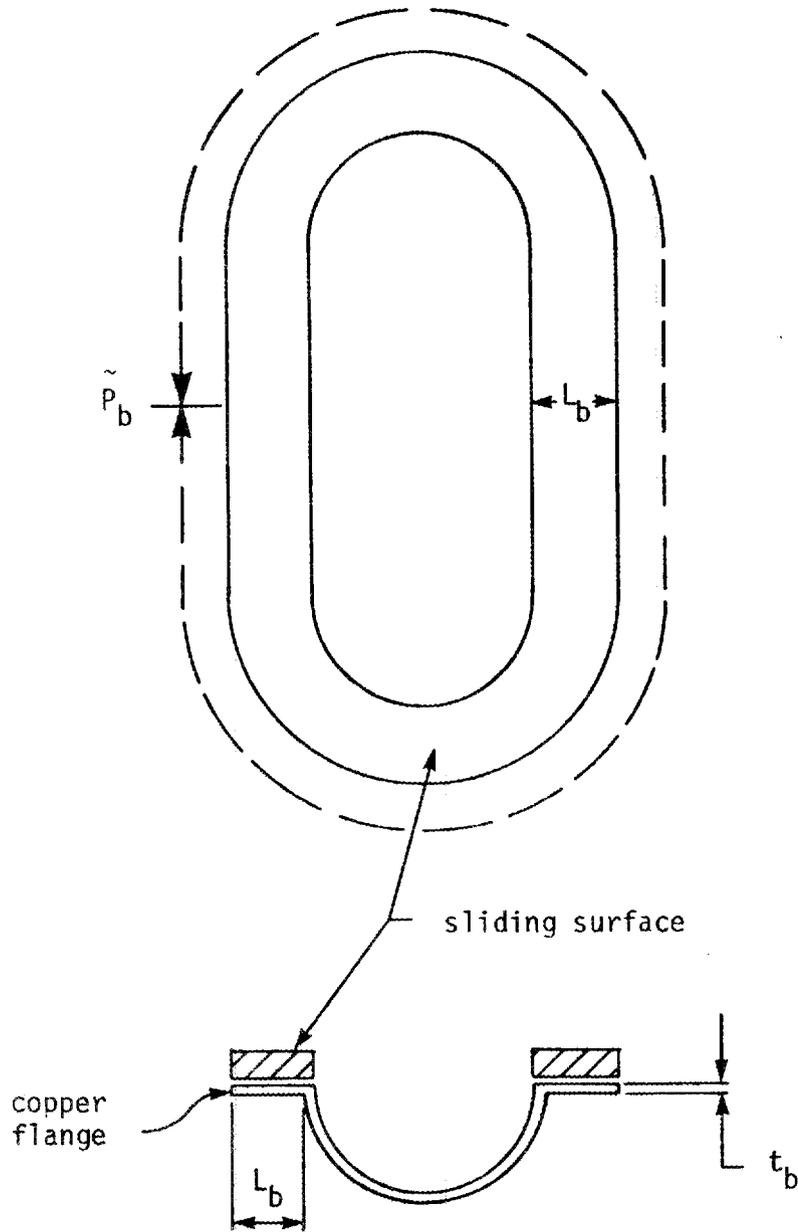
A Schematic of the Sliding Return Bend Used in the Ranco Reversing Valves. Note that \tilde{P}_b is the Perimeter of the Metal Flange.
